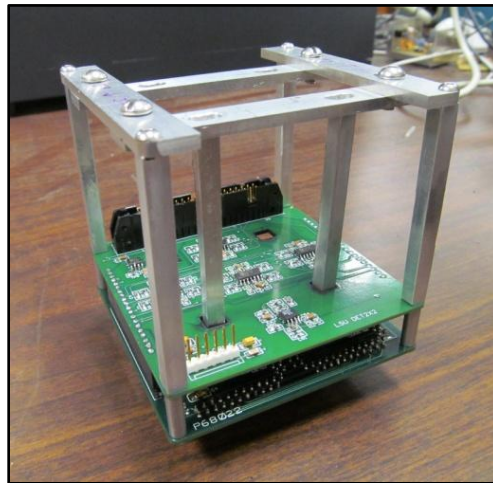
Assembled frame with two heat sinks in place. The signal routing board is visible on top of the detector carrier board. On the left side, one of the twenty-pin connectors is also visible between the boards.
